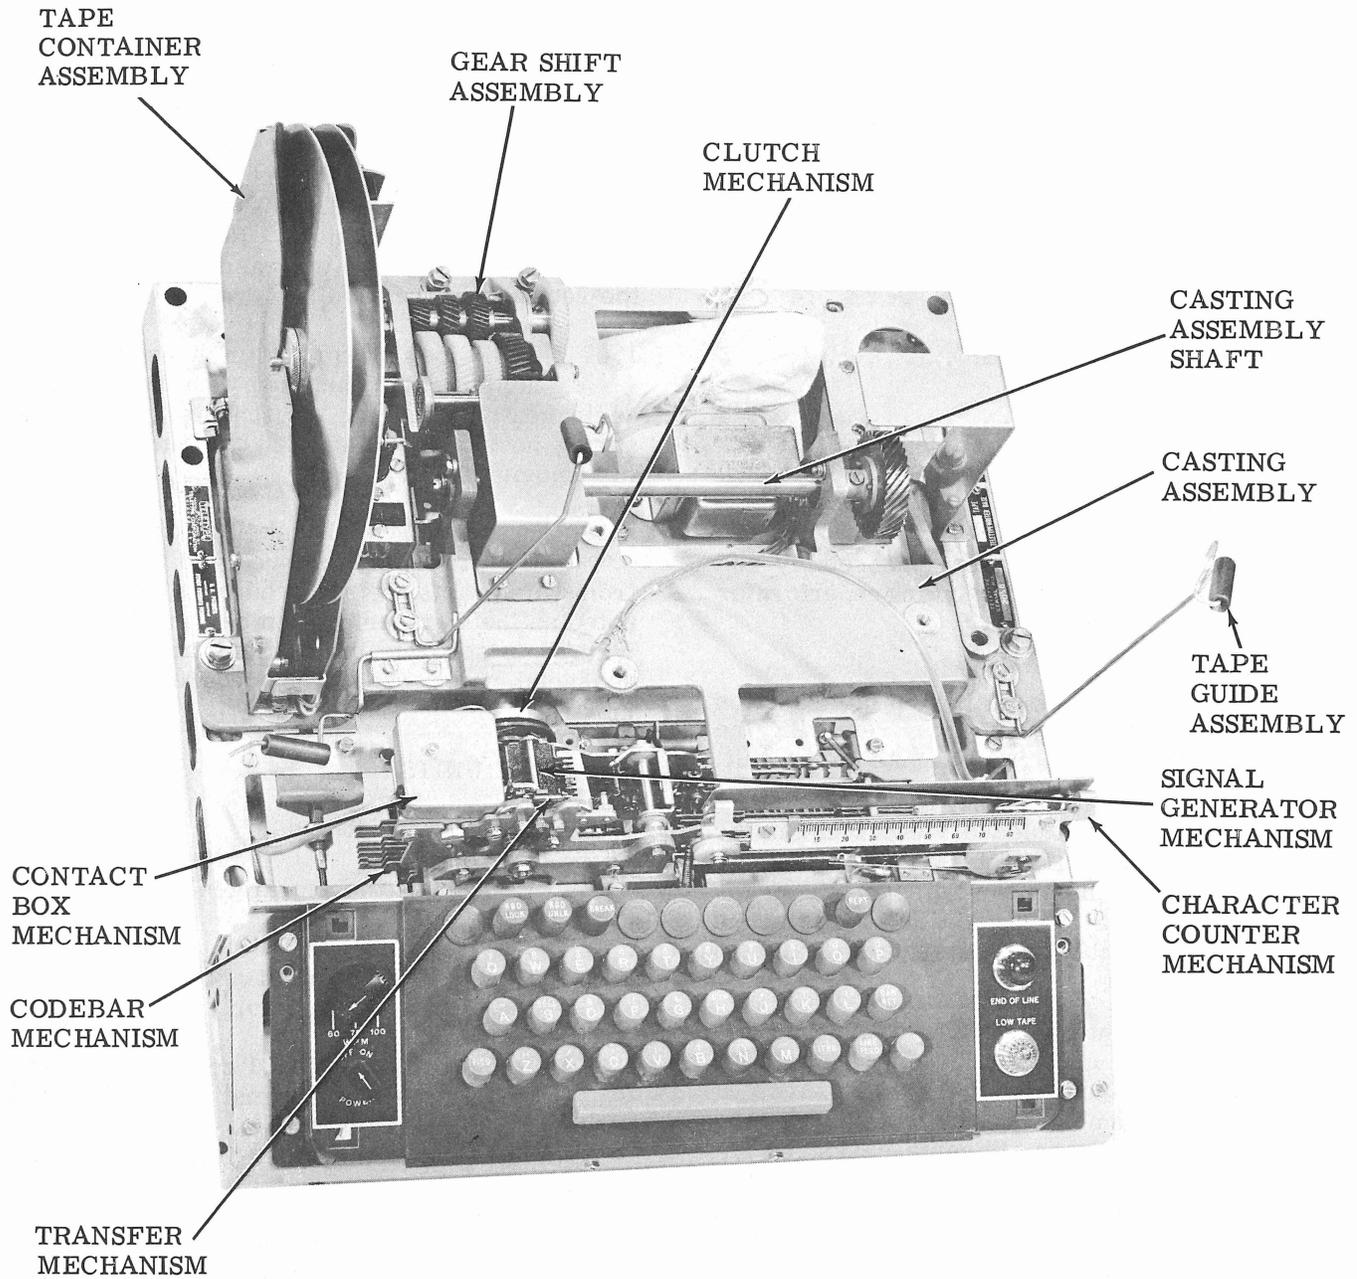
28 Tape Printer Keyboard (28 Typing Reperforator Keyboard is similar to the 28 Tape Printer Keyboard)
